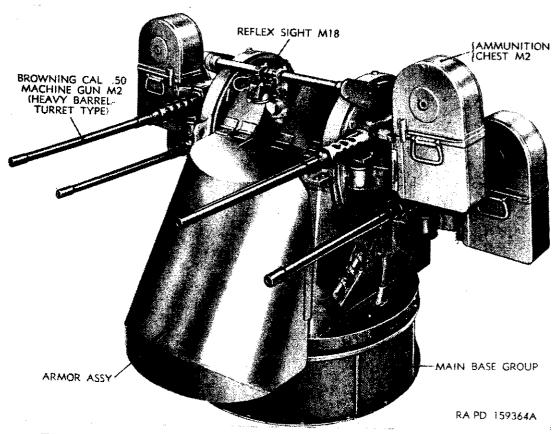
Multiple cal. 50 machine gun mount M45-left-front view.
